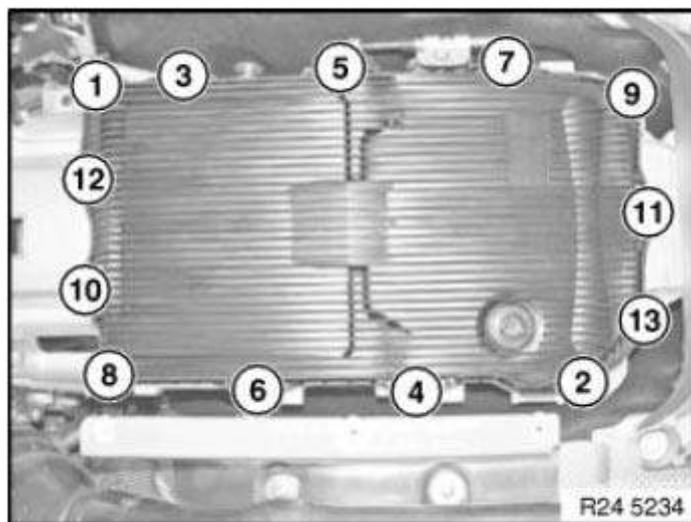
Transmission Oil Sump Bolts Tightening Sequence
